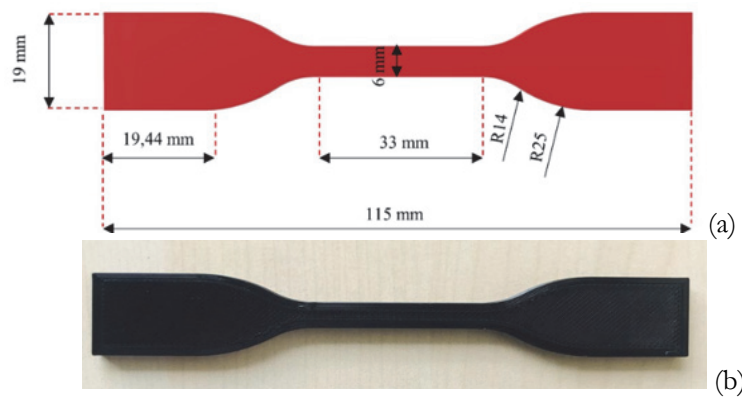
Dimensions of the test samples (a) and printed sample (b)
